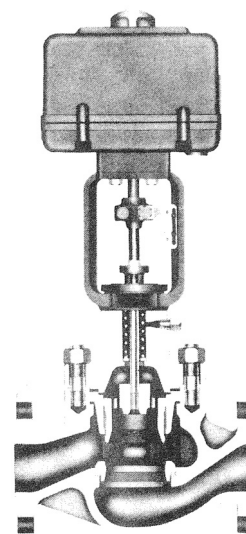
Model HCB Pressure-balanced Cage-type Control Valve
